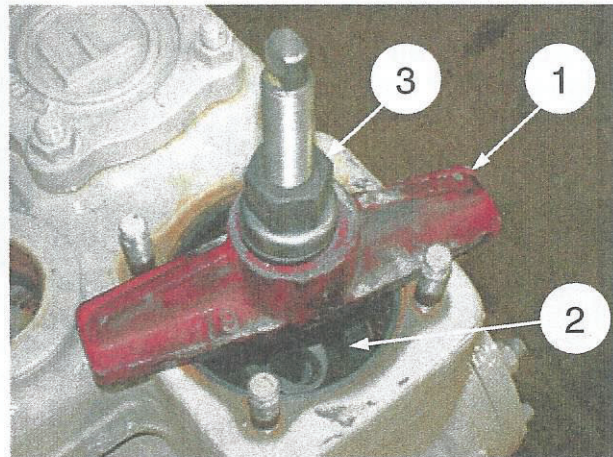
Mud Pump Valve Seat Removal; Because of the self locking taper used on this seat, a puller [1] must be used for proper removal. Insert the puller shoulders behind the valve seat [2]. Slowly tighten the nut [3] until the valve seat [2] is disengaged. The valve seat may then be lifted out. NOTE: When installing the valve seat, a wooden block should be used and care should be exercised in hammering the seat tightly in place.
